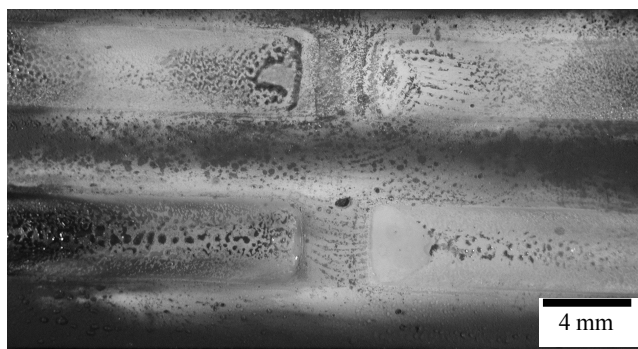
View of the X40CrMoV5-1 hot-work alloy tool steel after alloying with the WC tungsten carbide, laser power of 1.2-2.3 kW
